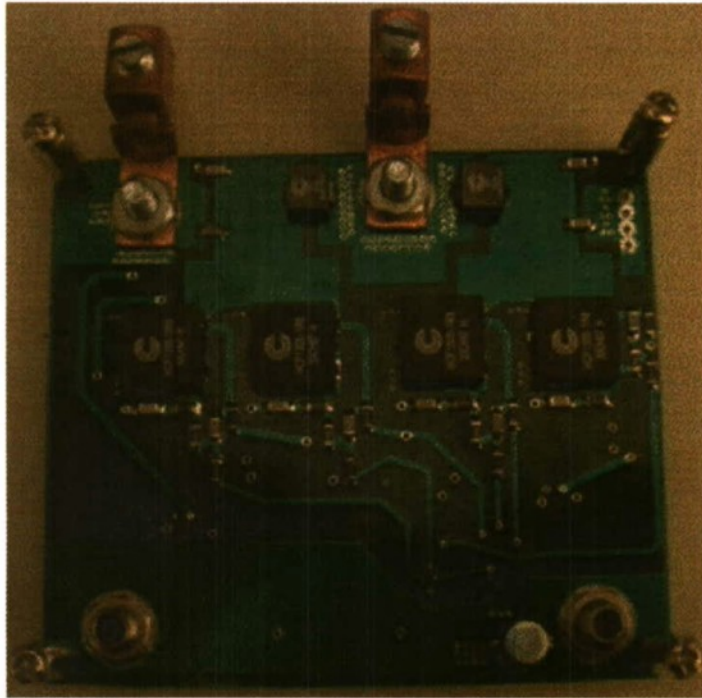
Finalized PCB of Topology 2 – bottom layer
